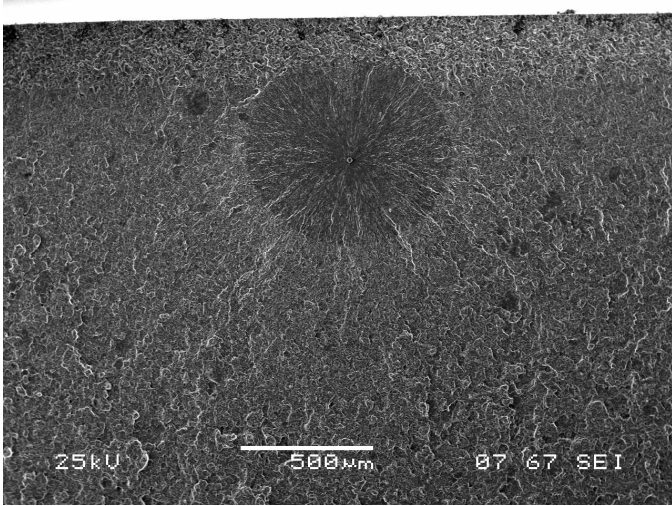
Showing the fracture surface of iteration 190 SN 16.
